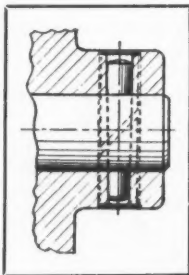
Drawing showing design of taper pin on which spring snap ring is used.
